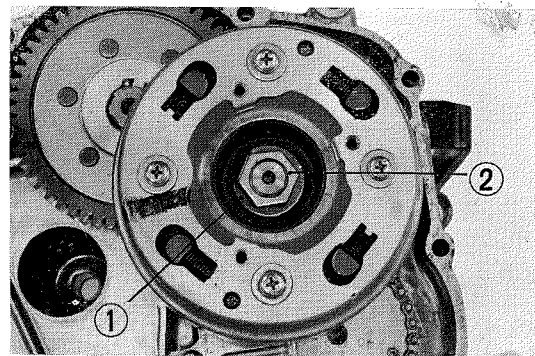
① 14mm. lock washer ② 14mm. lock nut
